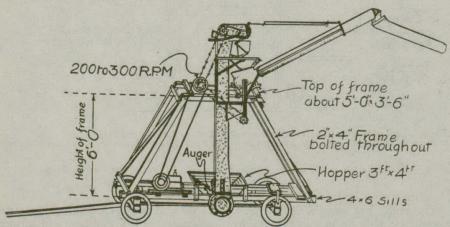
Complete elevator from an old threshing machine assembled on a frame which replaces separator body. Bottom grain auger, weigher and top auger conveyor included.
